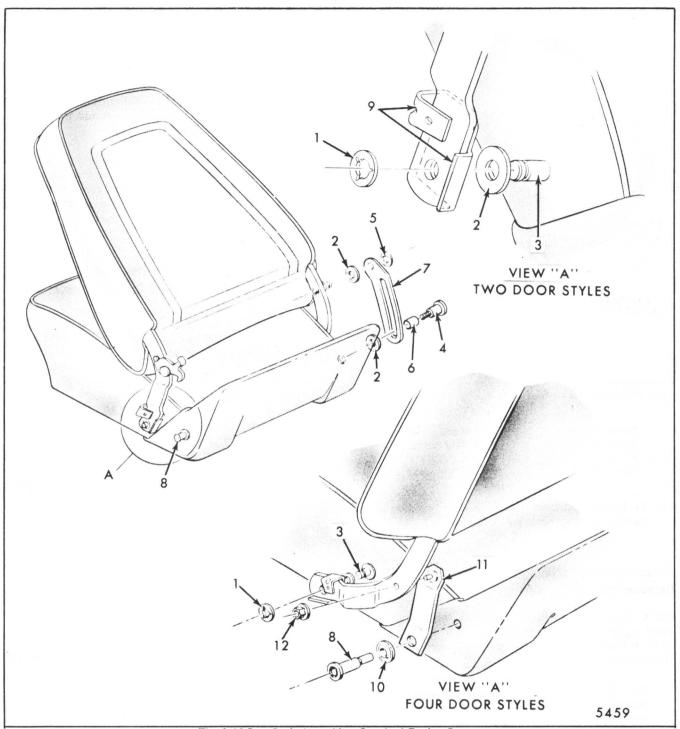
Seat Back Assembly - Standard Bucket Seats
